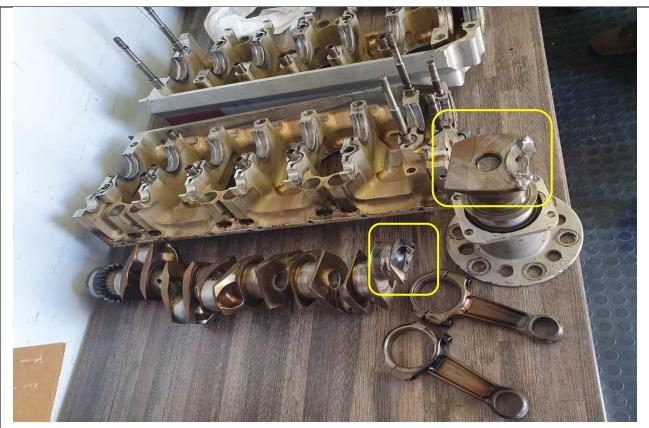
The dismantled engine with the fractured crankshaft. (Source: Manufacturer)
